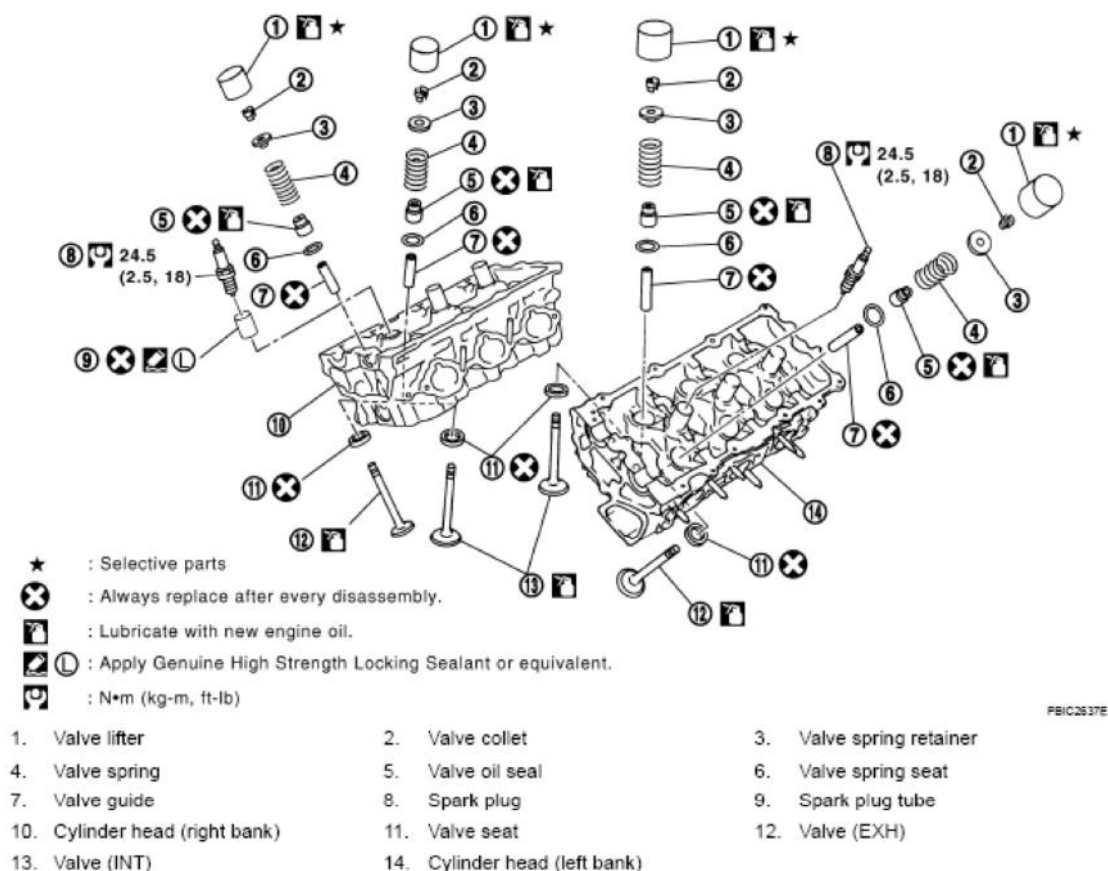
Disassembled View Of Cylinder Head Components With Torque Specifications
